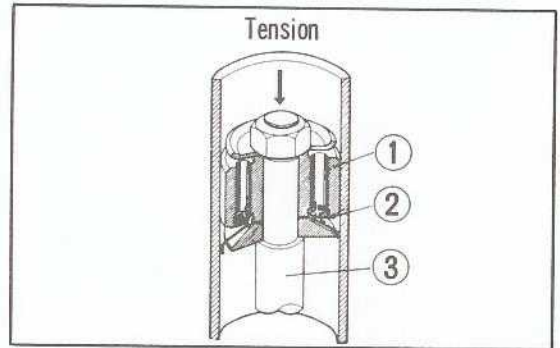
① Piston ② Valve ③ Rod
